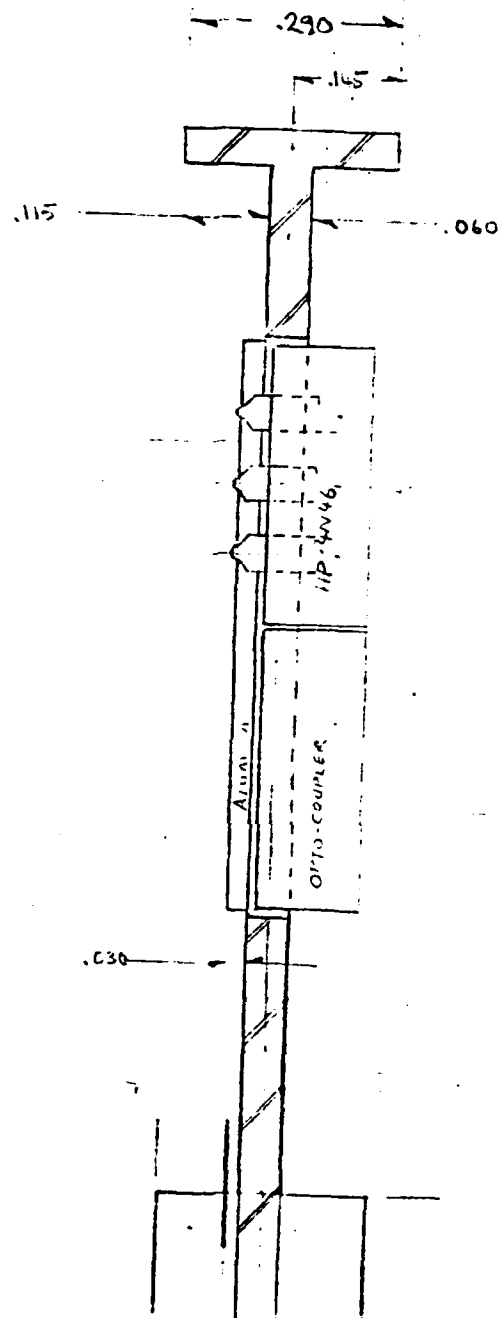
DETAIL OF OPTO - COUPLER MOUNTING ON "T" FRAME.
